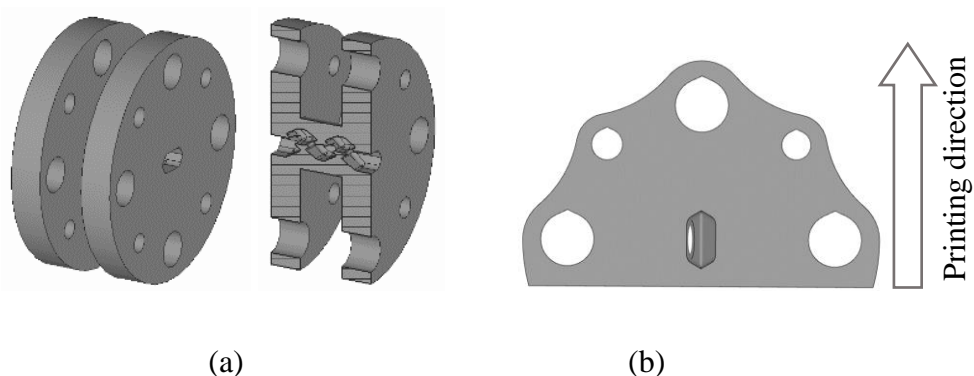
(a) Initial CAD model with full flanges. (b) Modified final model and the printing direction.
